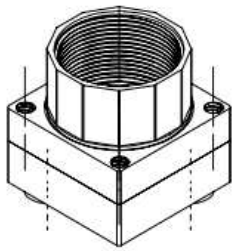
, lens mount adapter ADAPT-L, mechanical drawing
